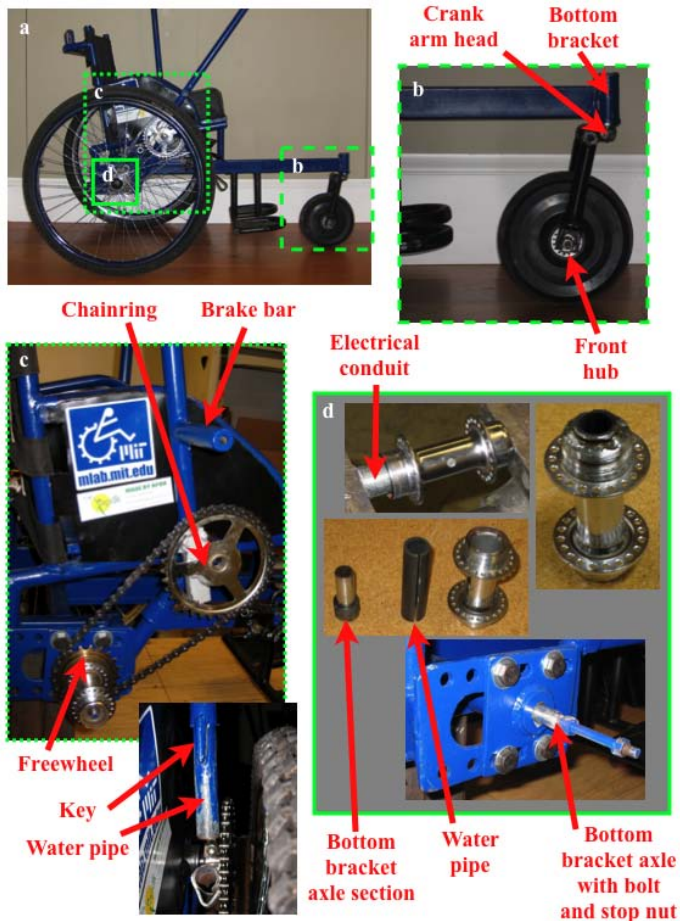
LFC BICYCLE PART CONSTRUCTION. a) All areas of the LFC with moving parts. b) The front caster assembly. c) Lever coupling to drivetrain made from water pipe. d) The rear hub and axle assembly, with hub inserts made from electrical conduit and water pipe.
